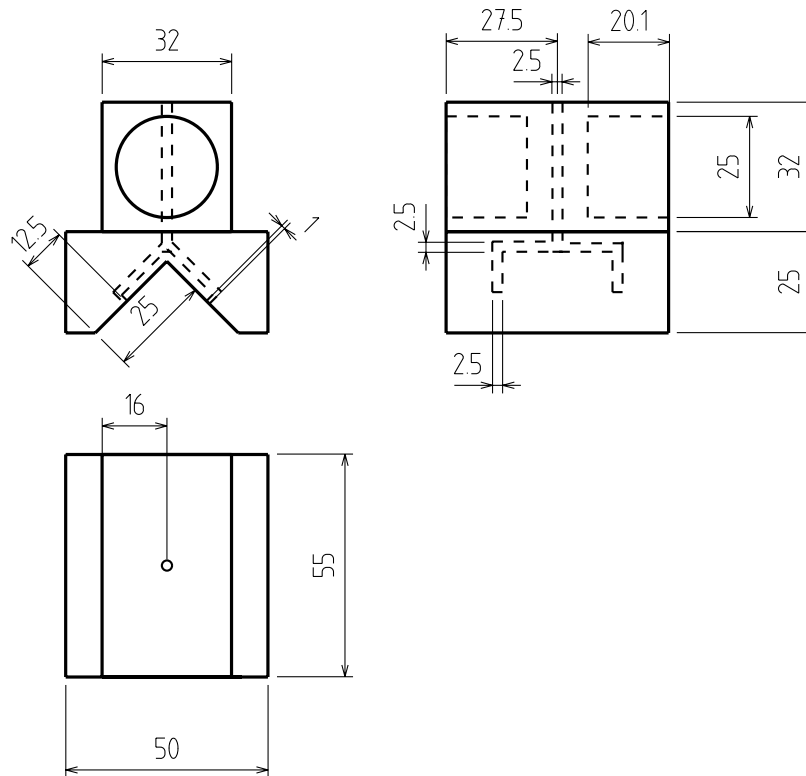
Technical drawings for the cart. Not shown are the teflon dowels and M2 nylon screw at either end for holding the cube corners in place. Additionally, a metal pipe was welded to the top to allow the attachment of the air supply.
